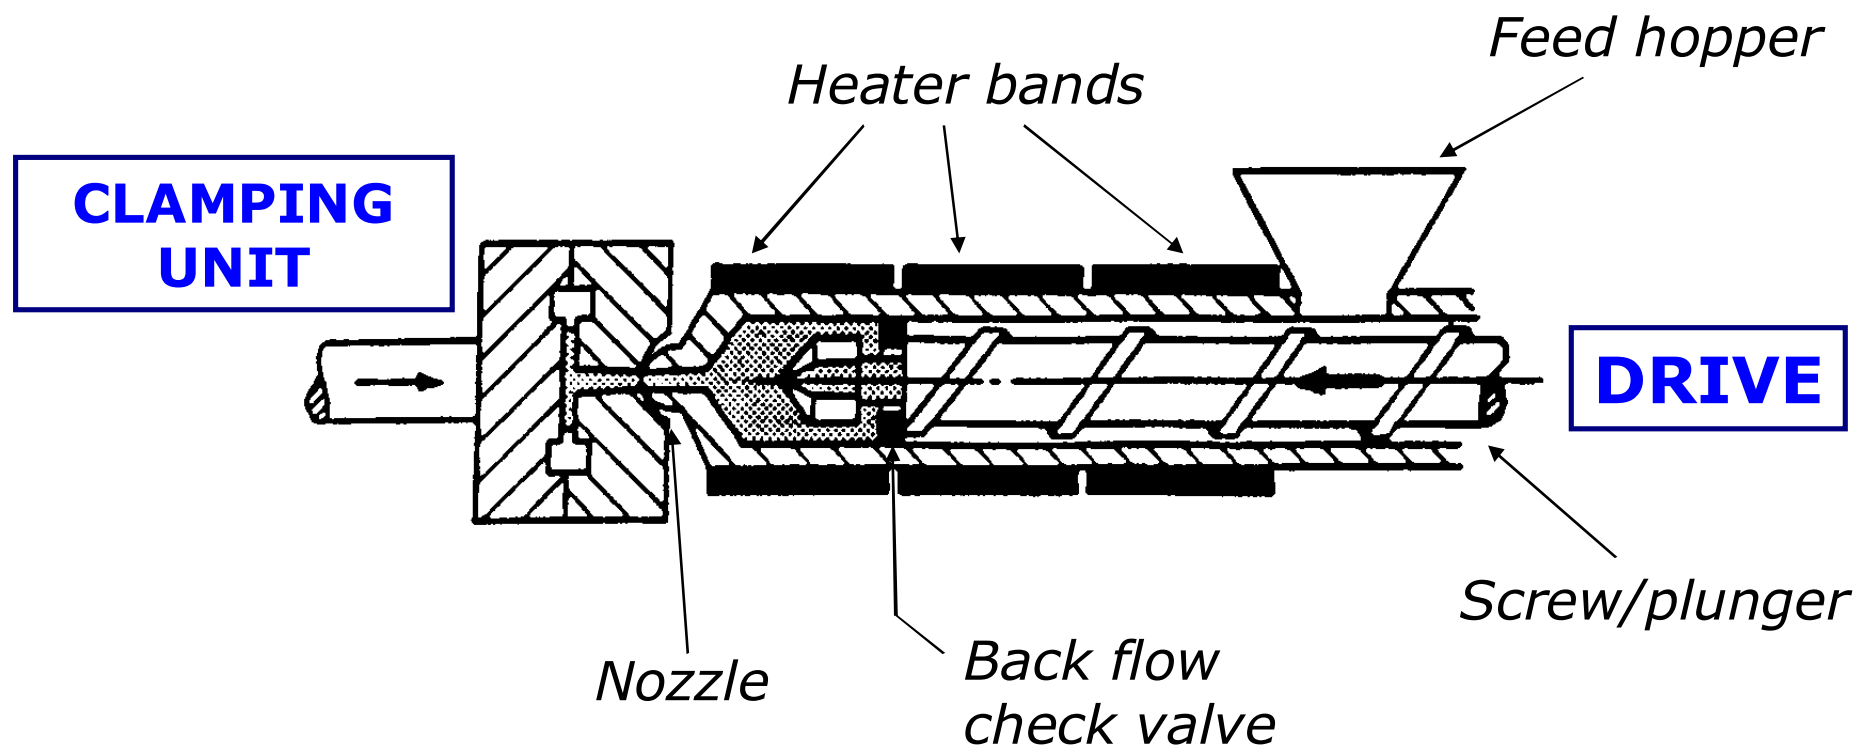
Injection moulding machine with screw preplasticator unit
